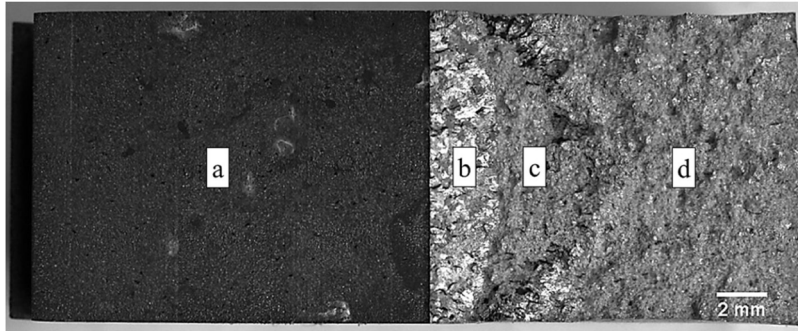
Fracture surface of the C(T) specimen Ref 4.155 showing the EDM notch (a), the fatigue pre-crack (b), the stable crack growth (c) and the fatigue post-crack (d).
